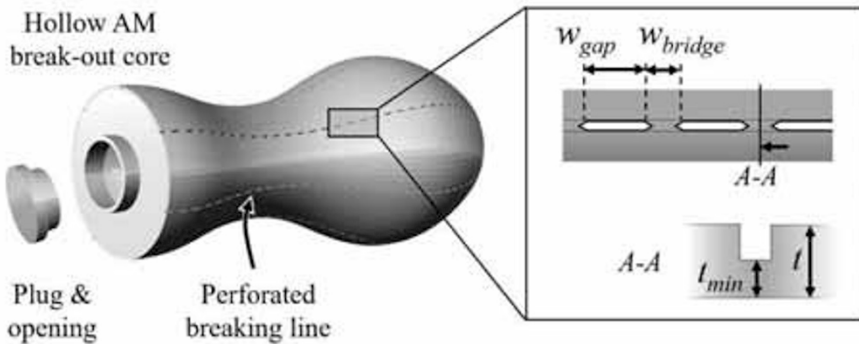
Thin-walled break-out core with perforated breaking lines defined by of gap width w_{gap} , bridge width w_{bridge} , wall thickness t of core, and reduced wall thickness t_{min} at breaking line.
